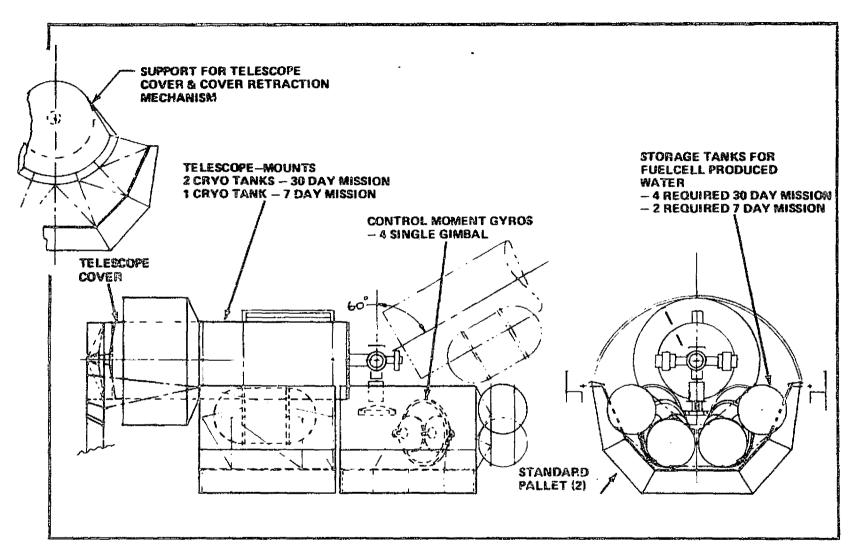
SIRTF Payload Bay Equipment Arrangement
